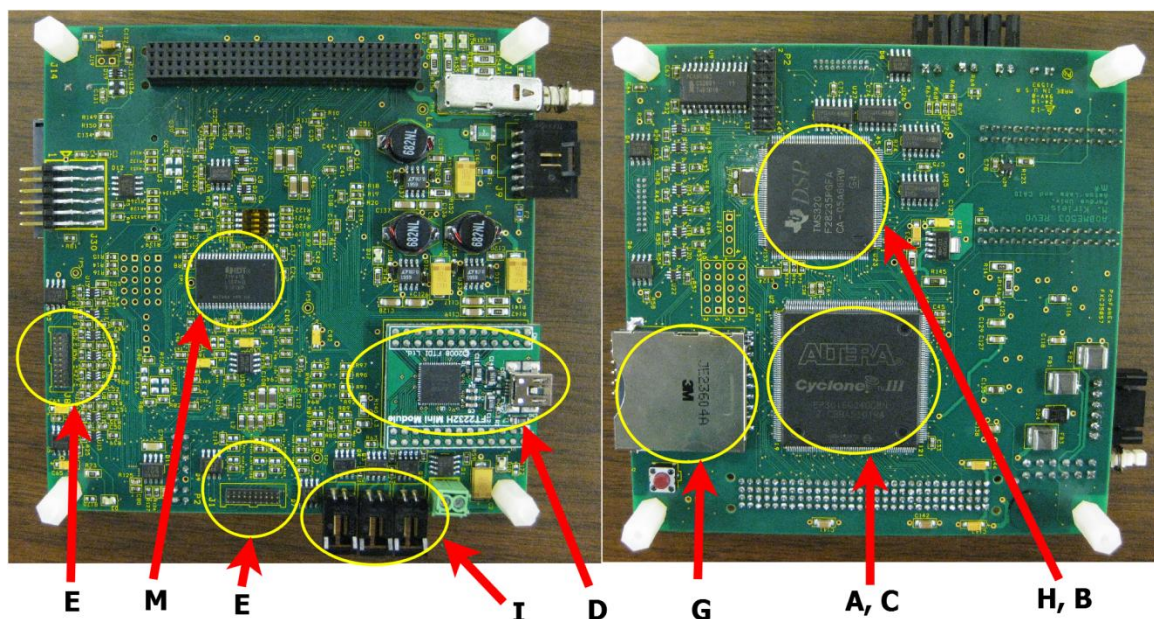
Top view (left) and bottom view (right) of the Control Board, A0BME503
